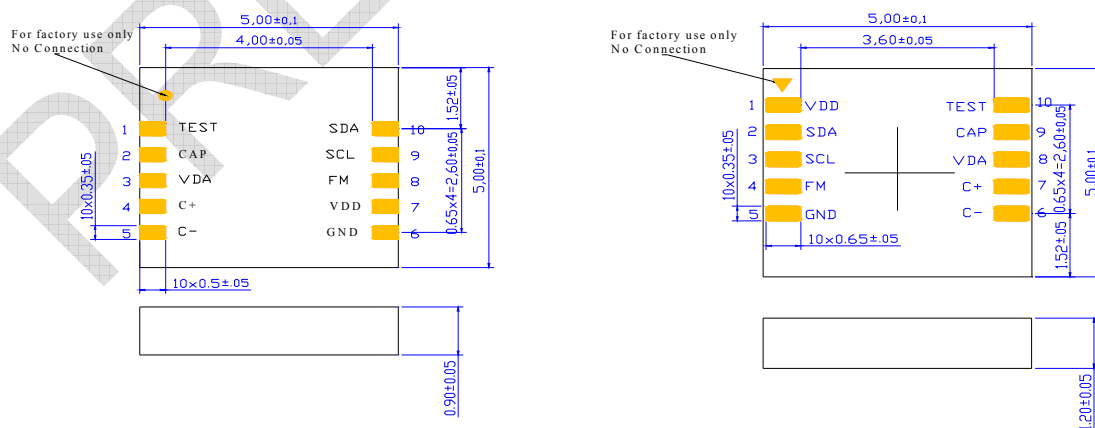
Package Diagram MMC212xM & MMC302xM (Top View)
